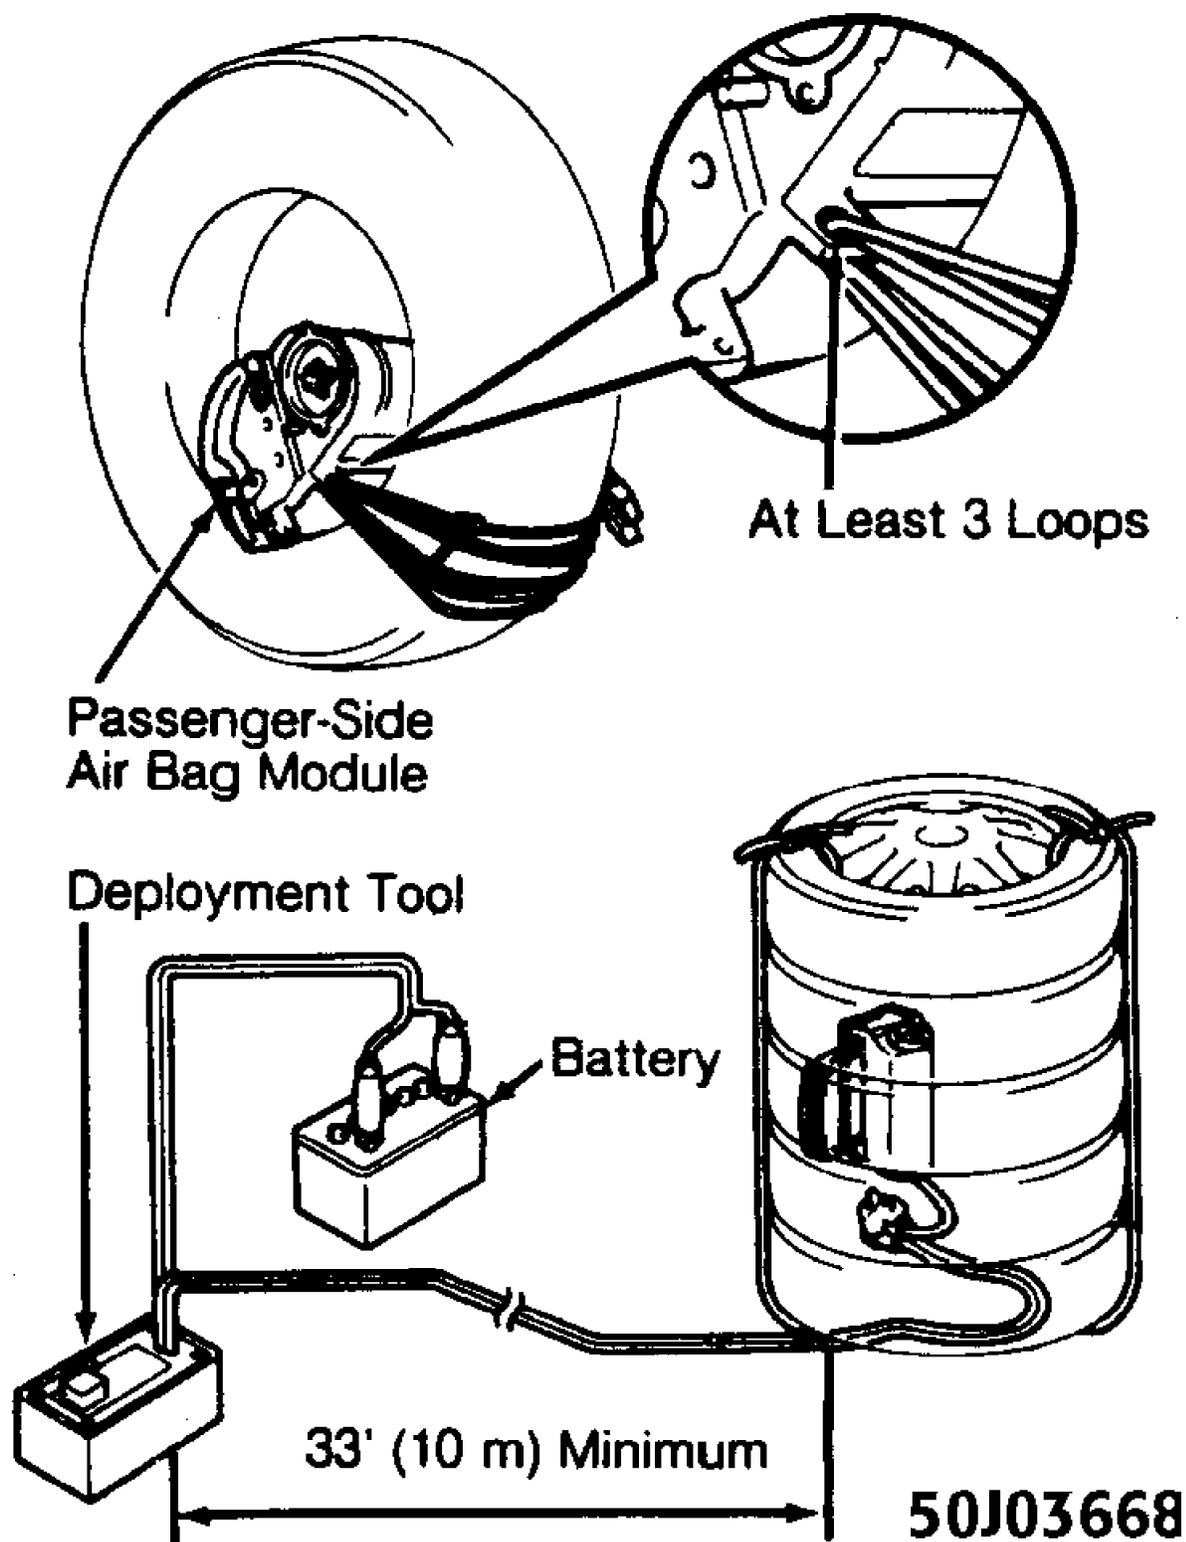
Installing Passenger-Side Air Bag Onto Wheel Assembly
